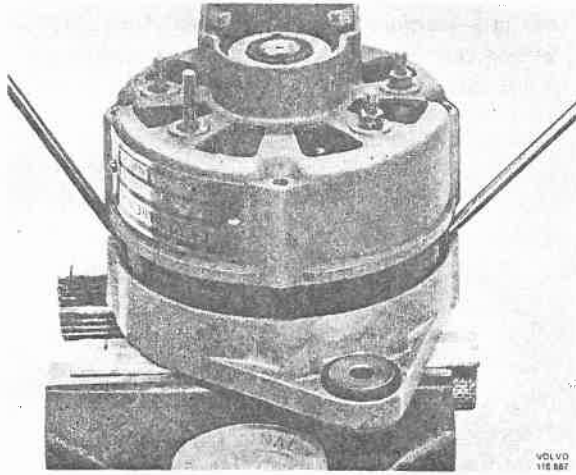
Removing the stator and slip ring bearing shield from rotor and drive bearing shield
